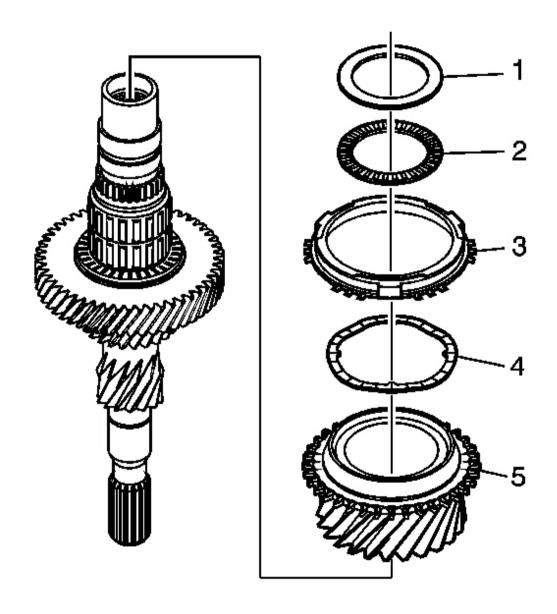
3rd Gear, Blocking Ring, Thrust Bearing & Wavy Washer Courtesy of GENERAL MOTORS CORP.
